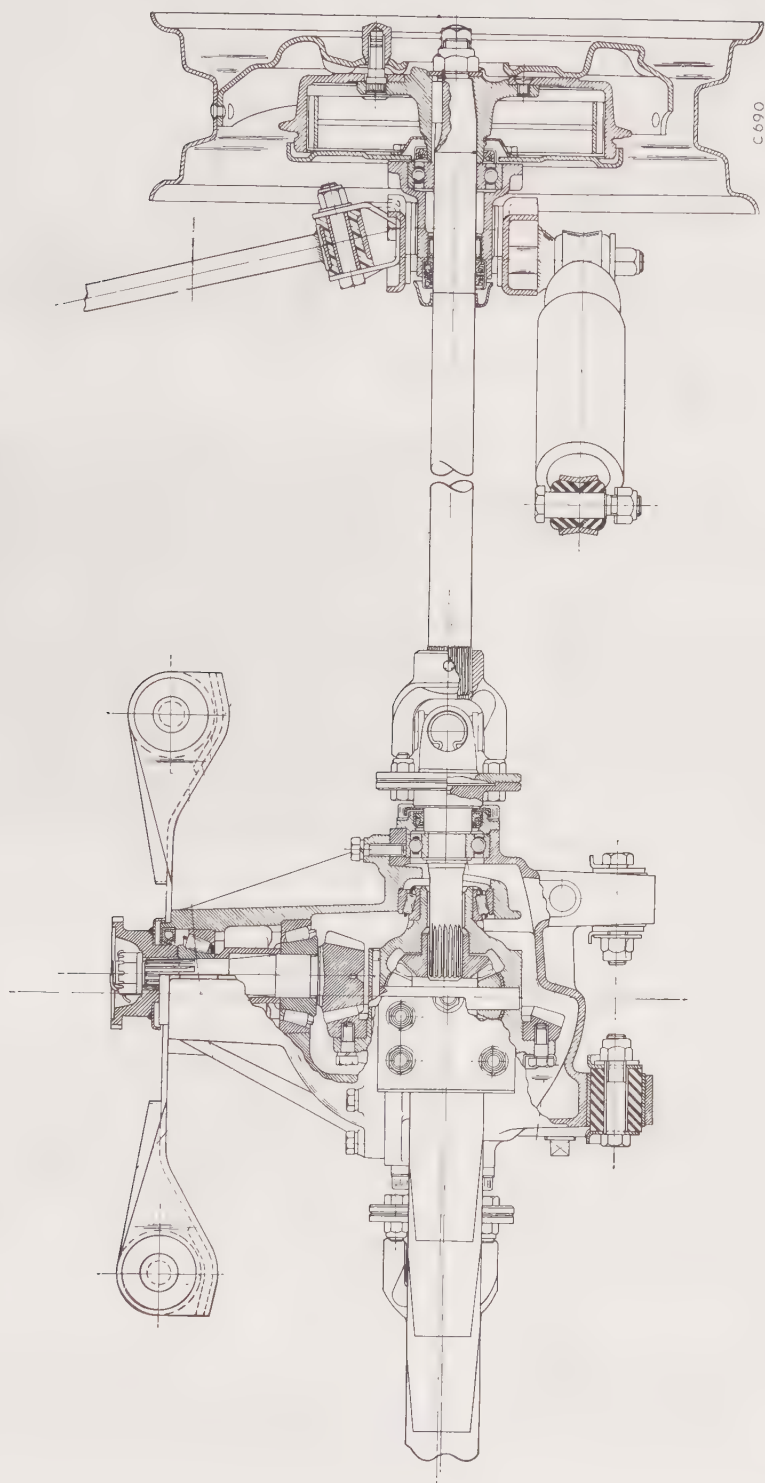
9 General arrangement of axle/shaft and hub assembly.
